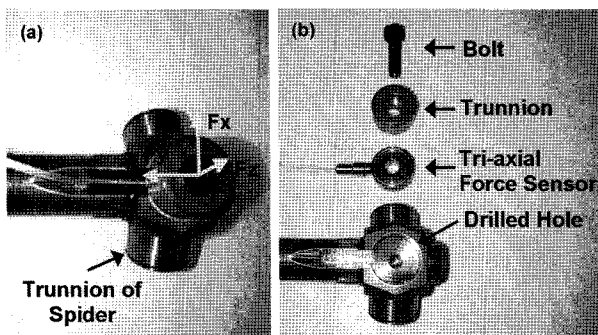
Installation of tri-axial force transducer: (a) assembled; (b) disassembled.
